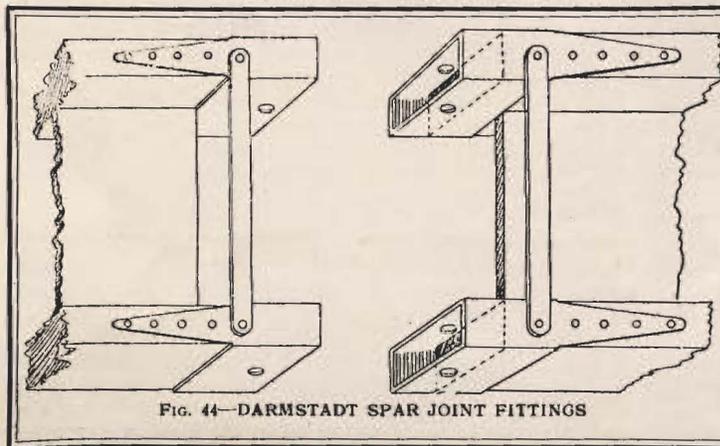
DARMSTADT SPAR JOINT FITTINGS
